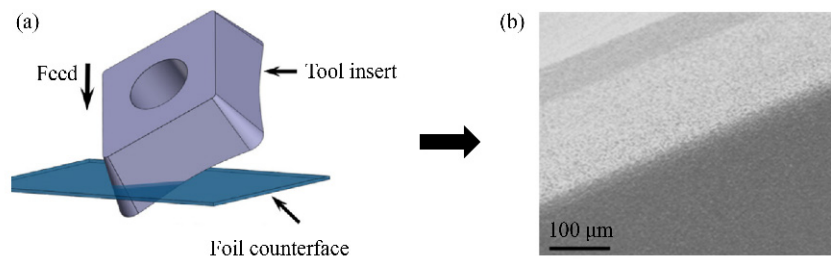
Cutting edge preparation by sinking electrical discharge machining [104]: (a) machining principle and (b) micromorphology of the prepared edge. Reproduced with permission from Elsevier. HSS: high-speed steel.
